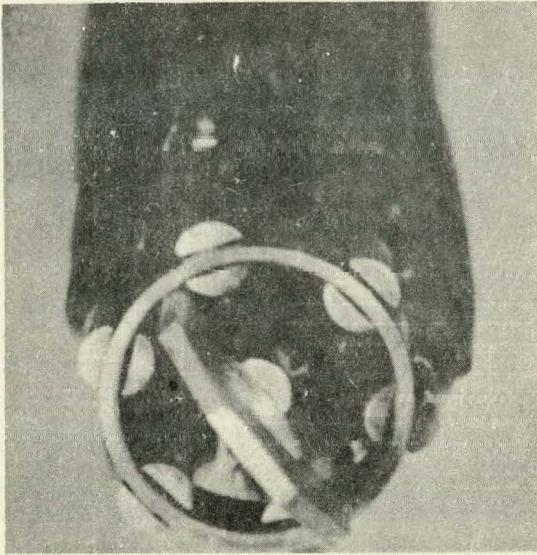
LOWER END OF FUEL ASSEMBLY PRIOR TO WELDING.
